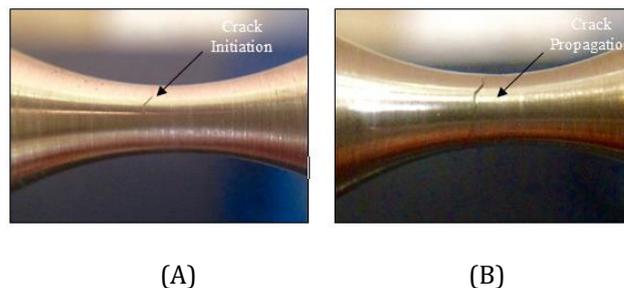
A- Crack initiation in case (Bending with torsion fatigue), B- Crack evolution in case (Bending with torsion fatigue)
